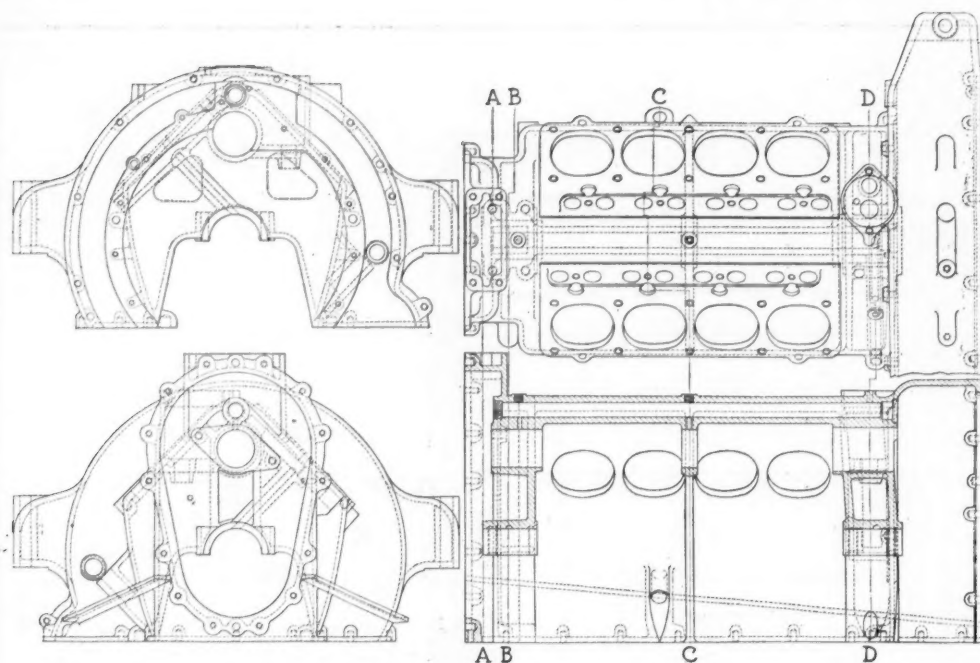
Oldsmobile bearings are carried in ribs which form a box section
